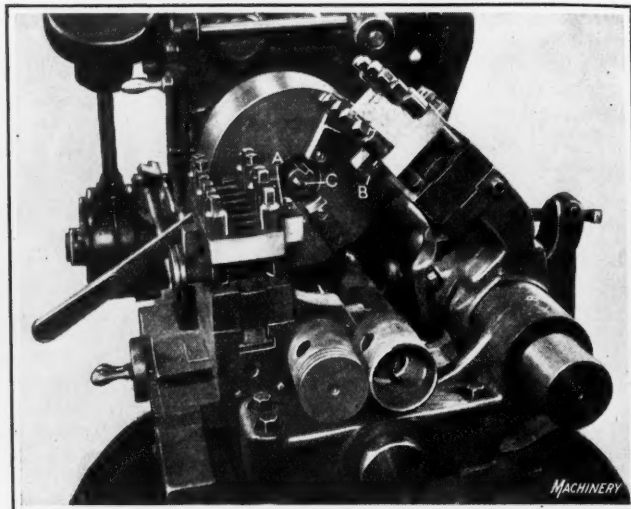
Fay Automatic Lathe tooled up for finish-boring and facing the Open End, and centering the Closed End of the Piston
